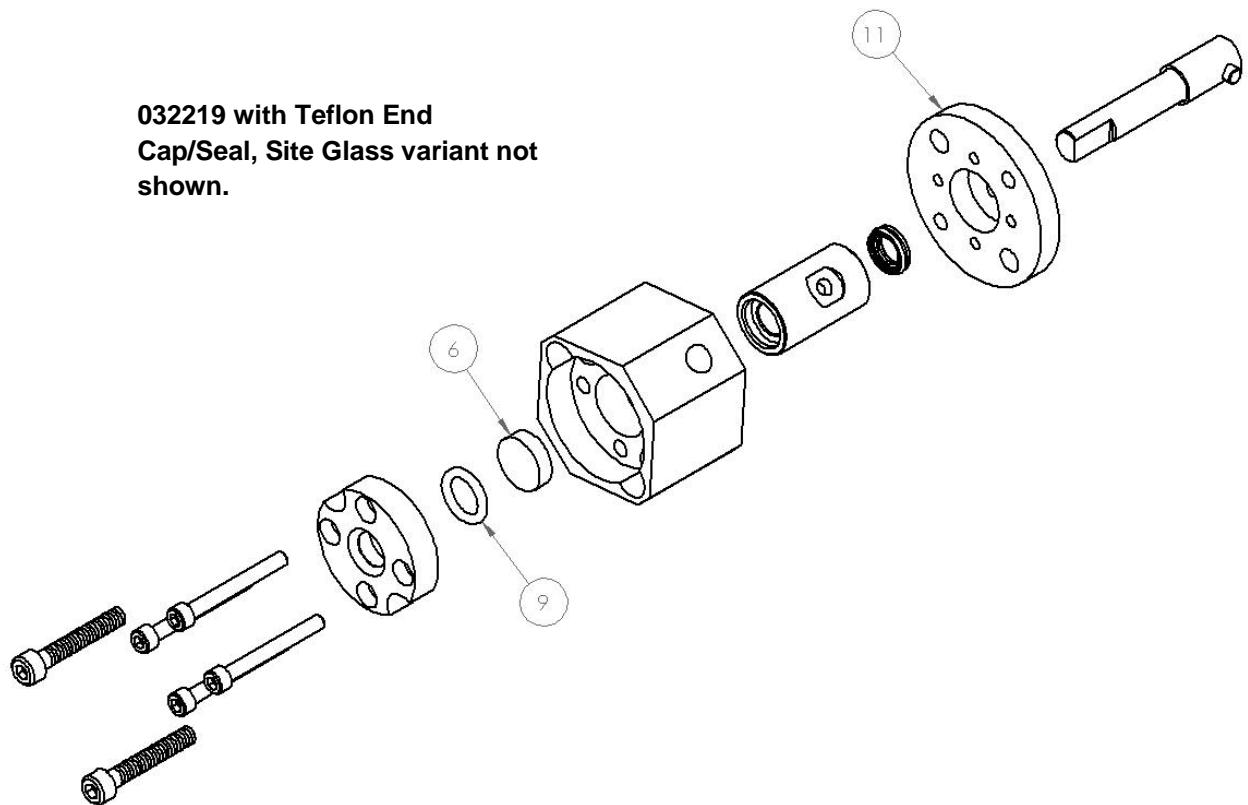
A-Series Linear Pump Module with Lip Seal Components Assembly/Disassembly
